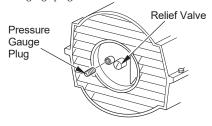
Pressure Gauge Plug Removal (70 Model Shown)
